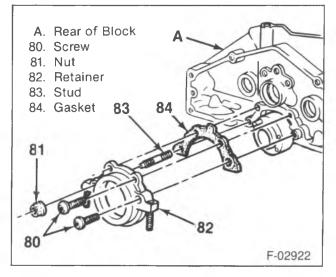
Rear Crankshaft Oil Seal Retainer Installation
